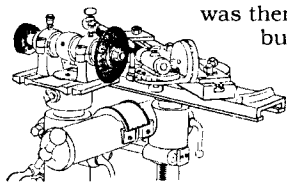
GRINDING WHEEL ON END OF CRANK.
